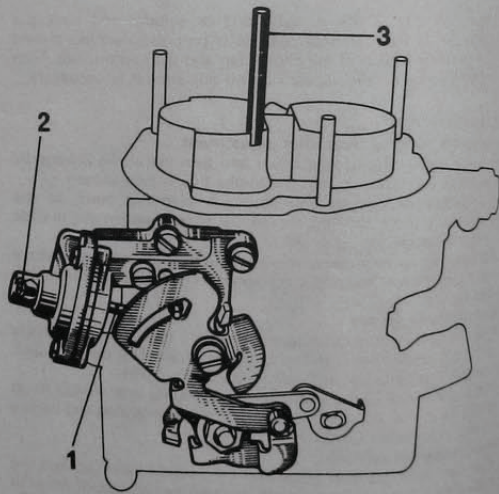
Choke flap pneumatic part opening setting - Weber carburettor (Sec 17)
